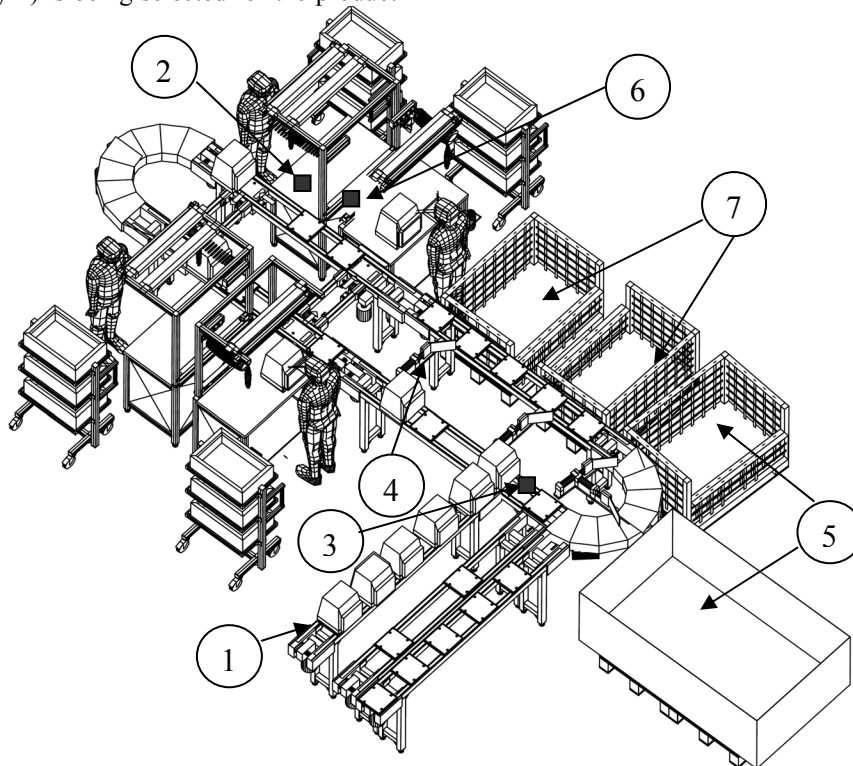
RFID technology implemented in the disassembly process and selection of disassembled parts of the products
